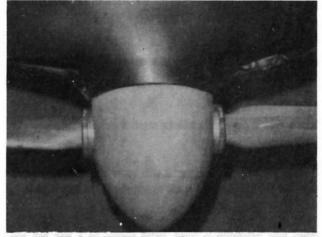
Completed spinner and variable pitch propeller assembly.
